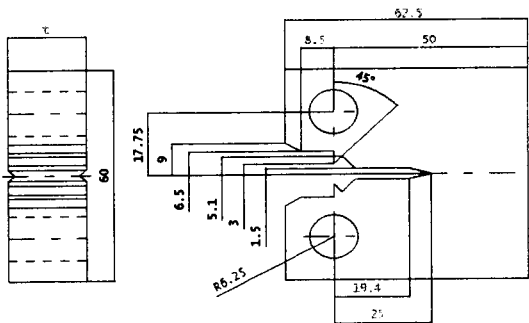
Geometry and sizes of CT type specimen for plane-stress fracture toughness test.
